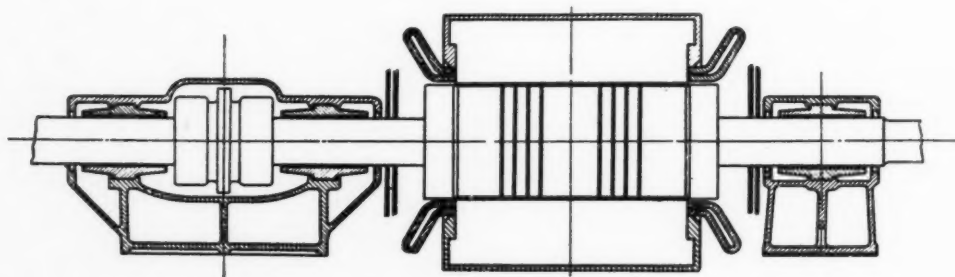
Journal bearing arrangement of typical large turbo-generator. Total length is 18 feet as compared with 14 feet, the length of the useful part between bearings
